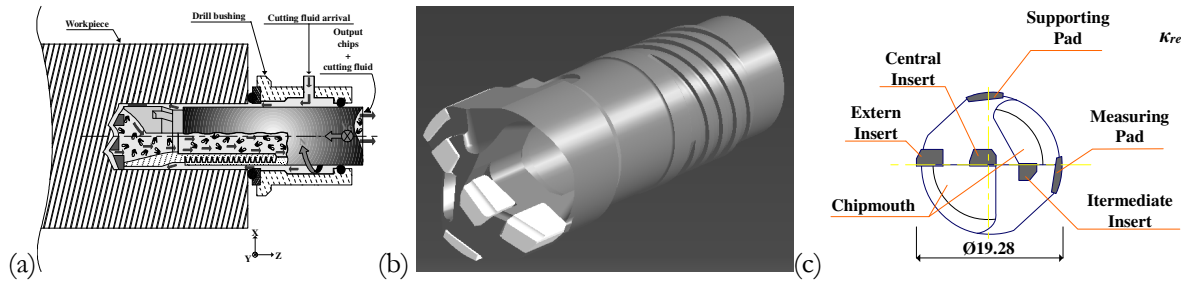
(a) Schematic representation of the deep hole drilling with BTA-STS system, (b) BTA deep hole drilling tool and (c) main parts of the drilling tool.
